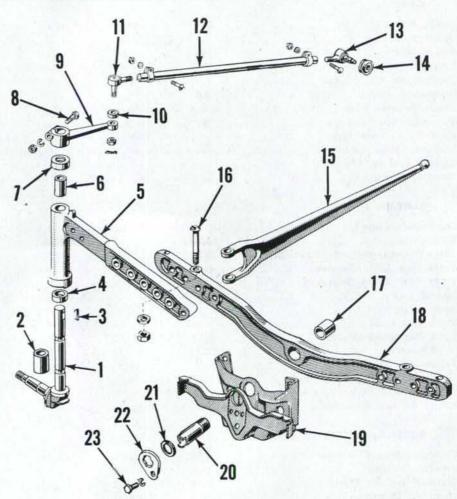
Exploded view of All-Purpose type front axle and related parts. Optional "heavy duty" front axle is similarly constructed except that pivot pin (20) has hex head. snap ring (21) is not used and retainer (22) has hex opening for pivot pin head. A flat washer (not shown) is used on cap screw (23) between retainer (22) and front support (19) on "heavy duty" assemblies to prevent retainer from being cocked. Early production pivot pin was not threaded and pivot pin (20) and retainer (22) were integral welded
